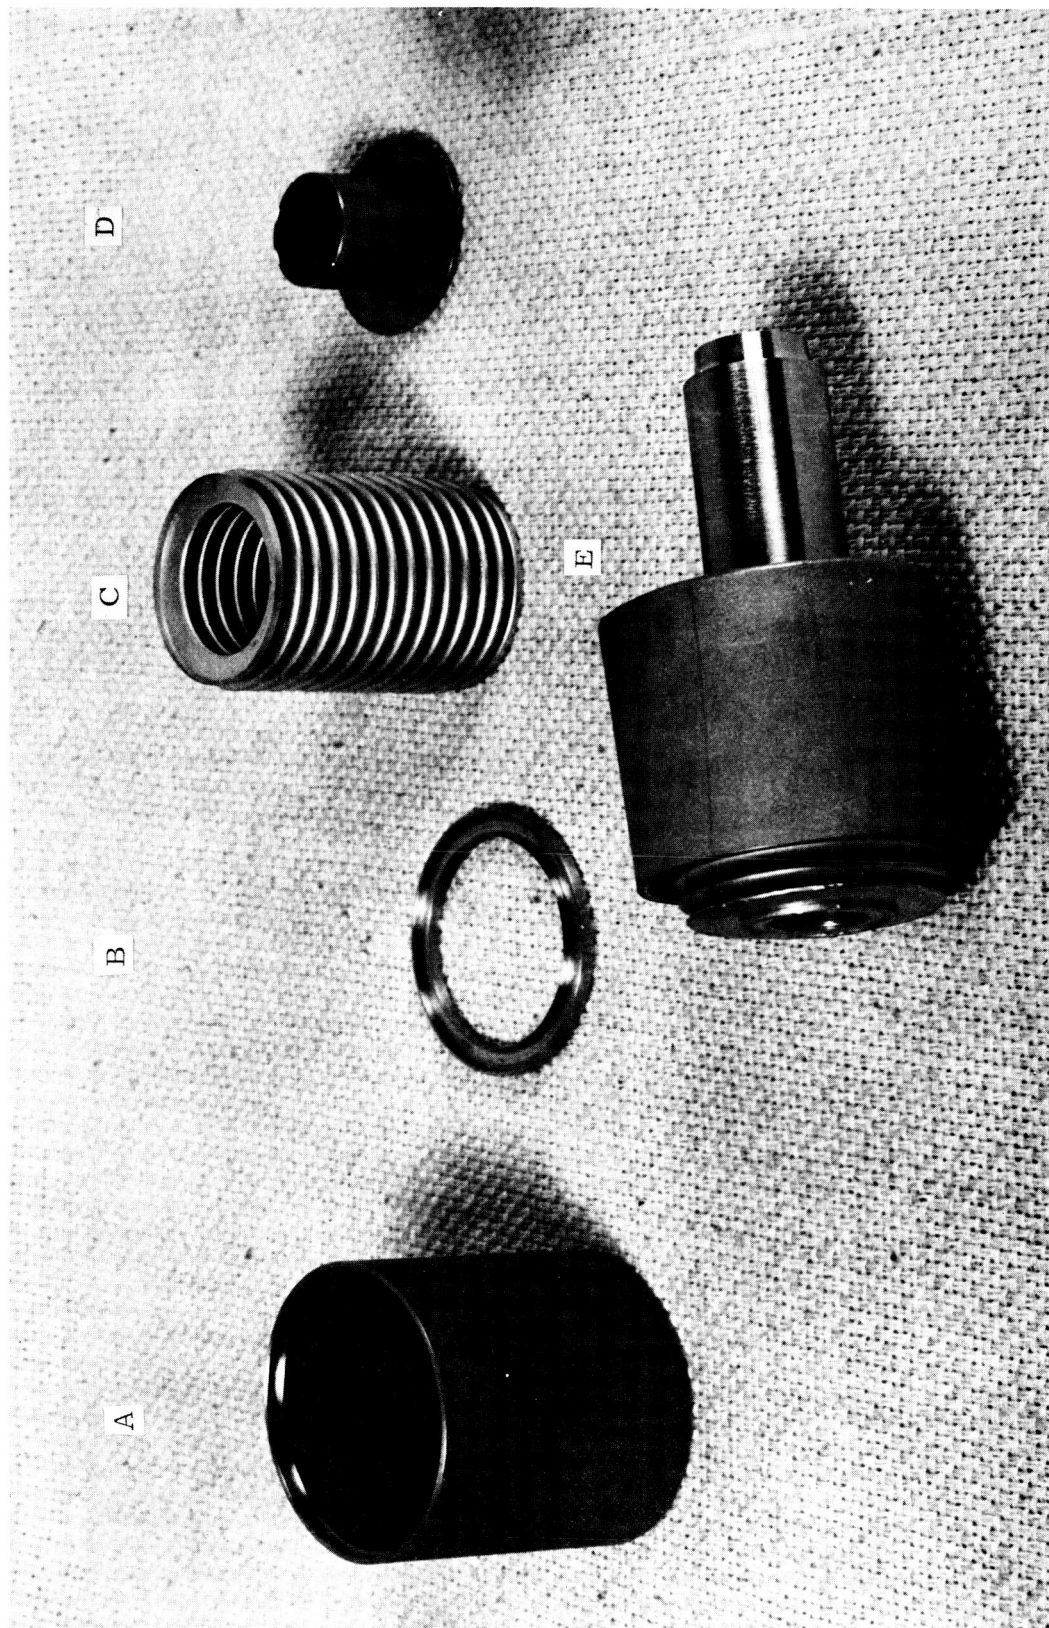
Movable Electrode Parts and Welded Assembly
